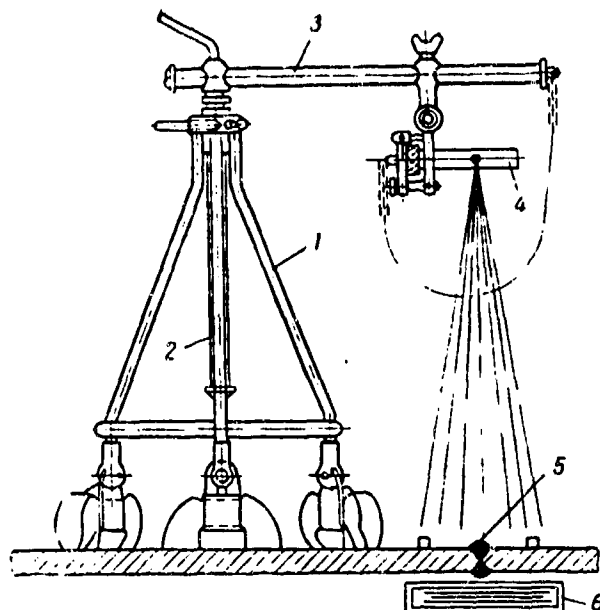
Diagram Showing the X-Ray Inspection of Welded Joints: 1 - stand containing permanent magnets; 2 - vertical guide; 3 - horizontal guide (track); 4 - can containing an ampule of radioactive substance; 5 - welded seam; 6 - case containing the film.
